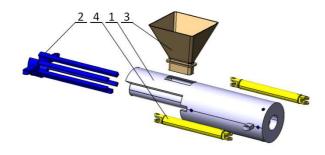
Exploded view of a concept model: 1 – main sleeve, 2 – closing element with a group of inlets, 3 – polymer hopper, 4 – pneumatic cylinder
